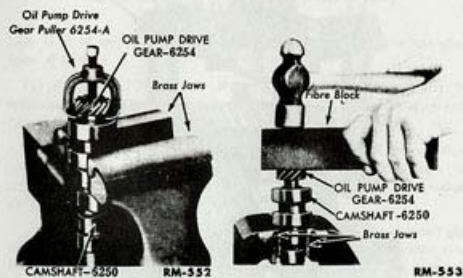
Removing Oil Pump Drive Gear From Camshaft
